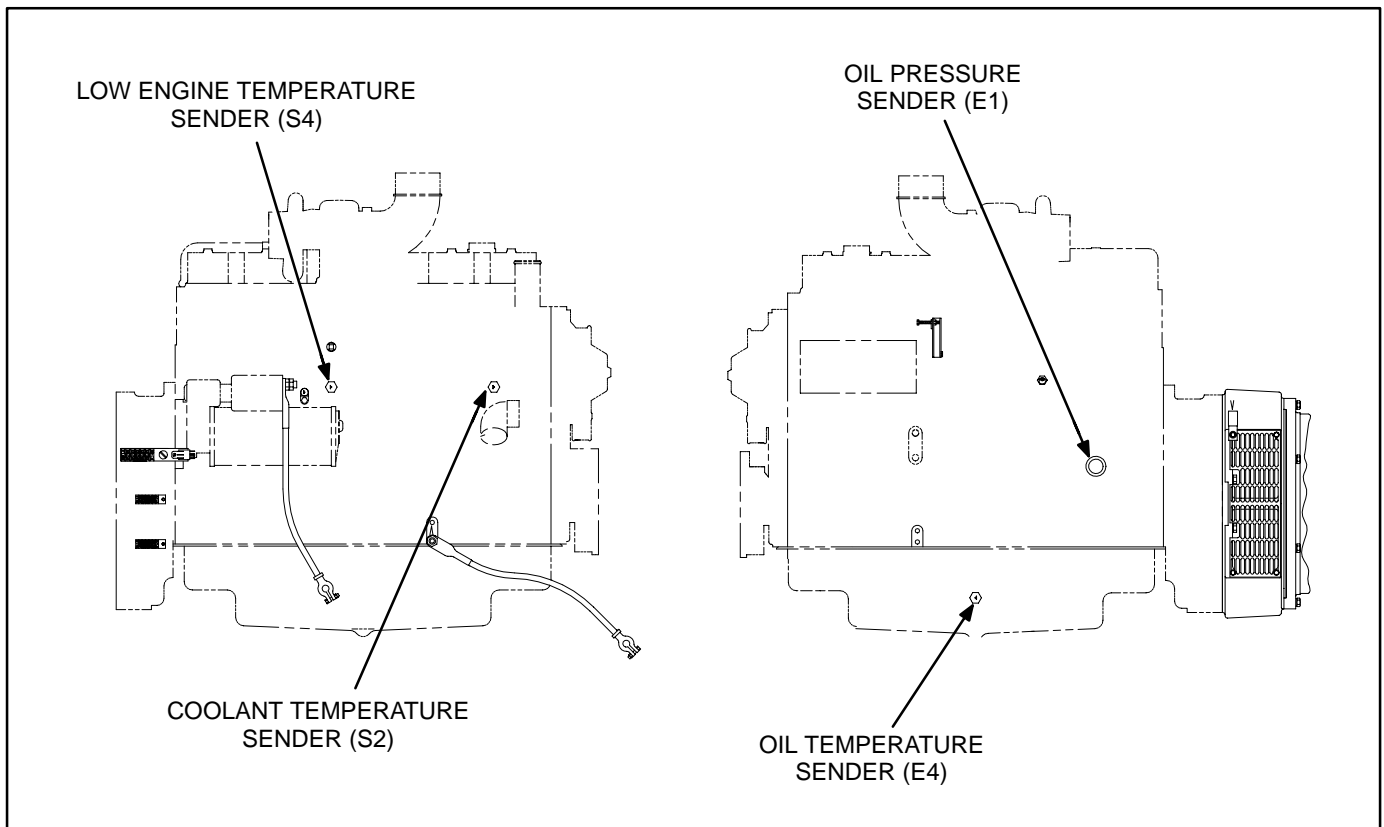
ENGINE SENSOR LOCATIONS (6C SERIES ENGINES)
